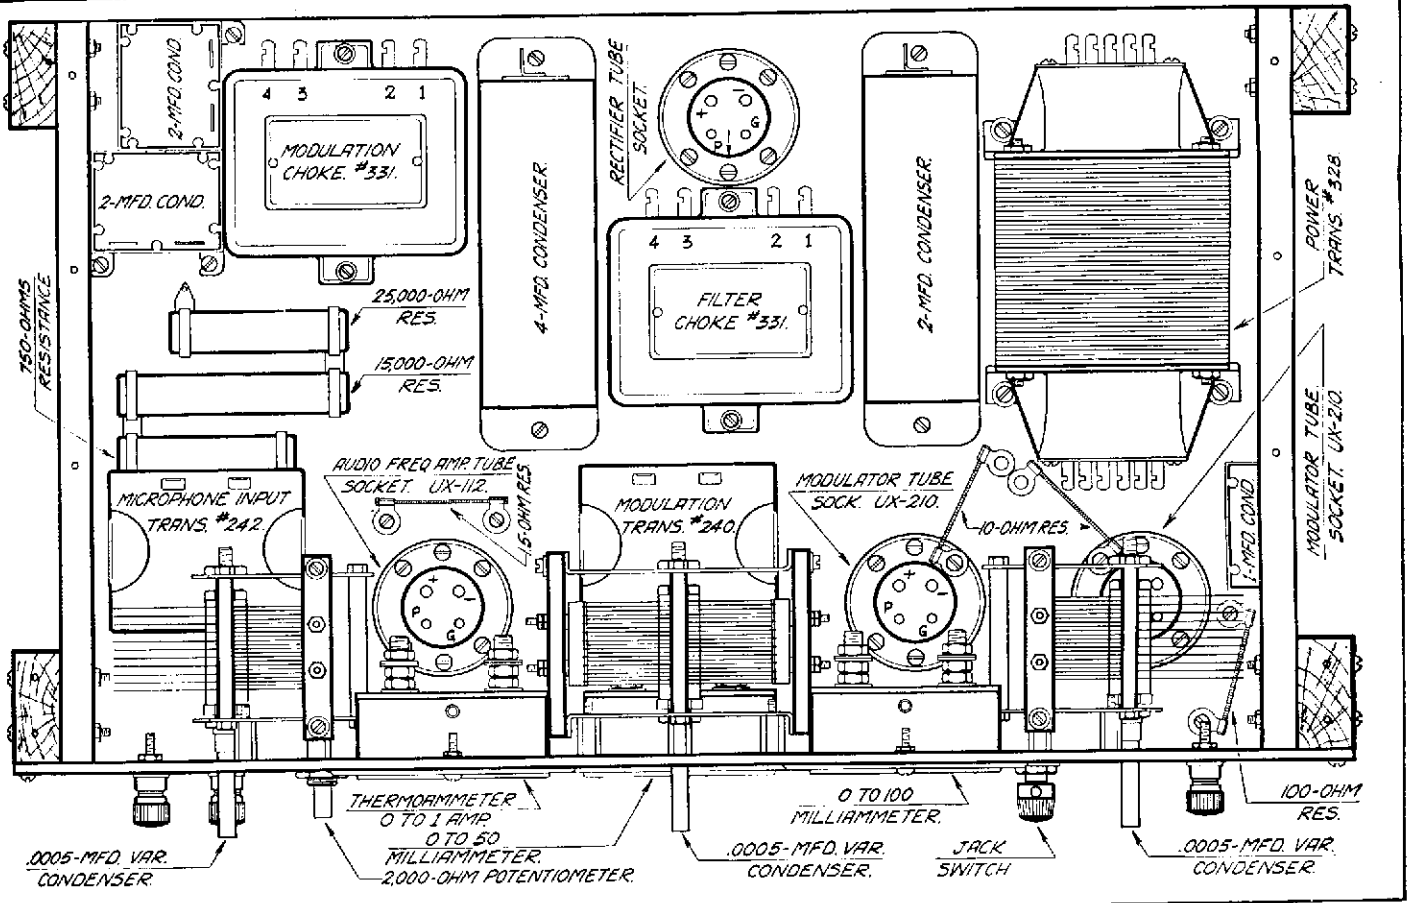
The baseboard layout shown above represents the manner in which parts should be placed on the lower shelf, where all of the power apparatus is located
